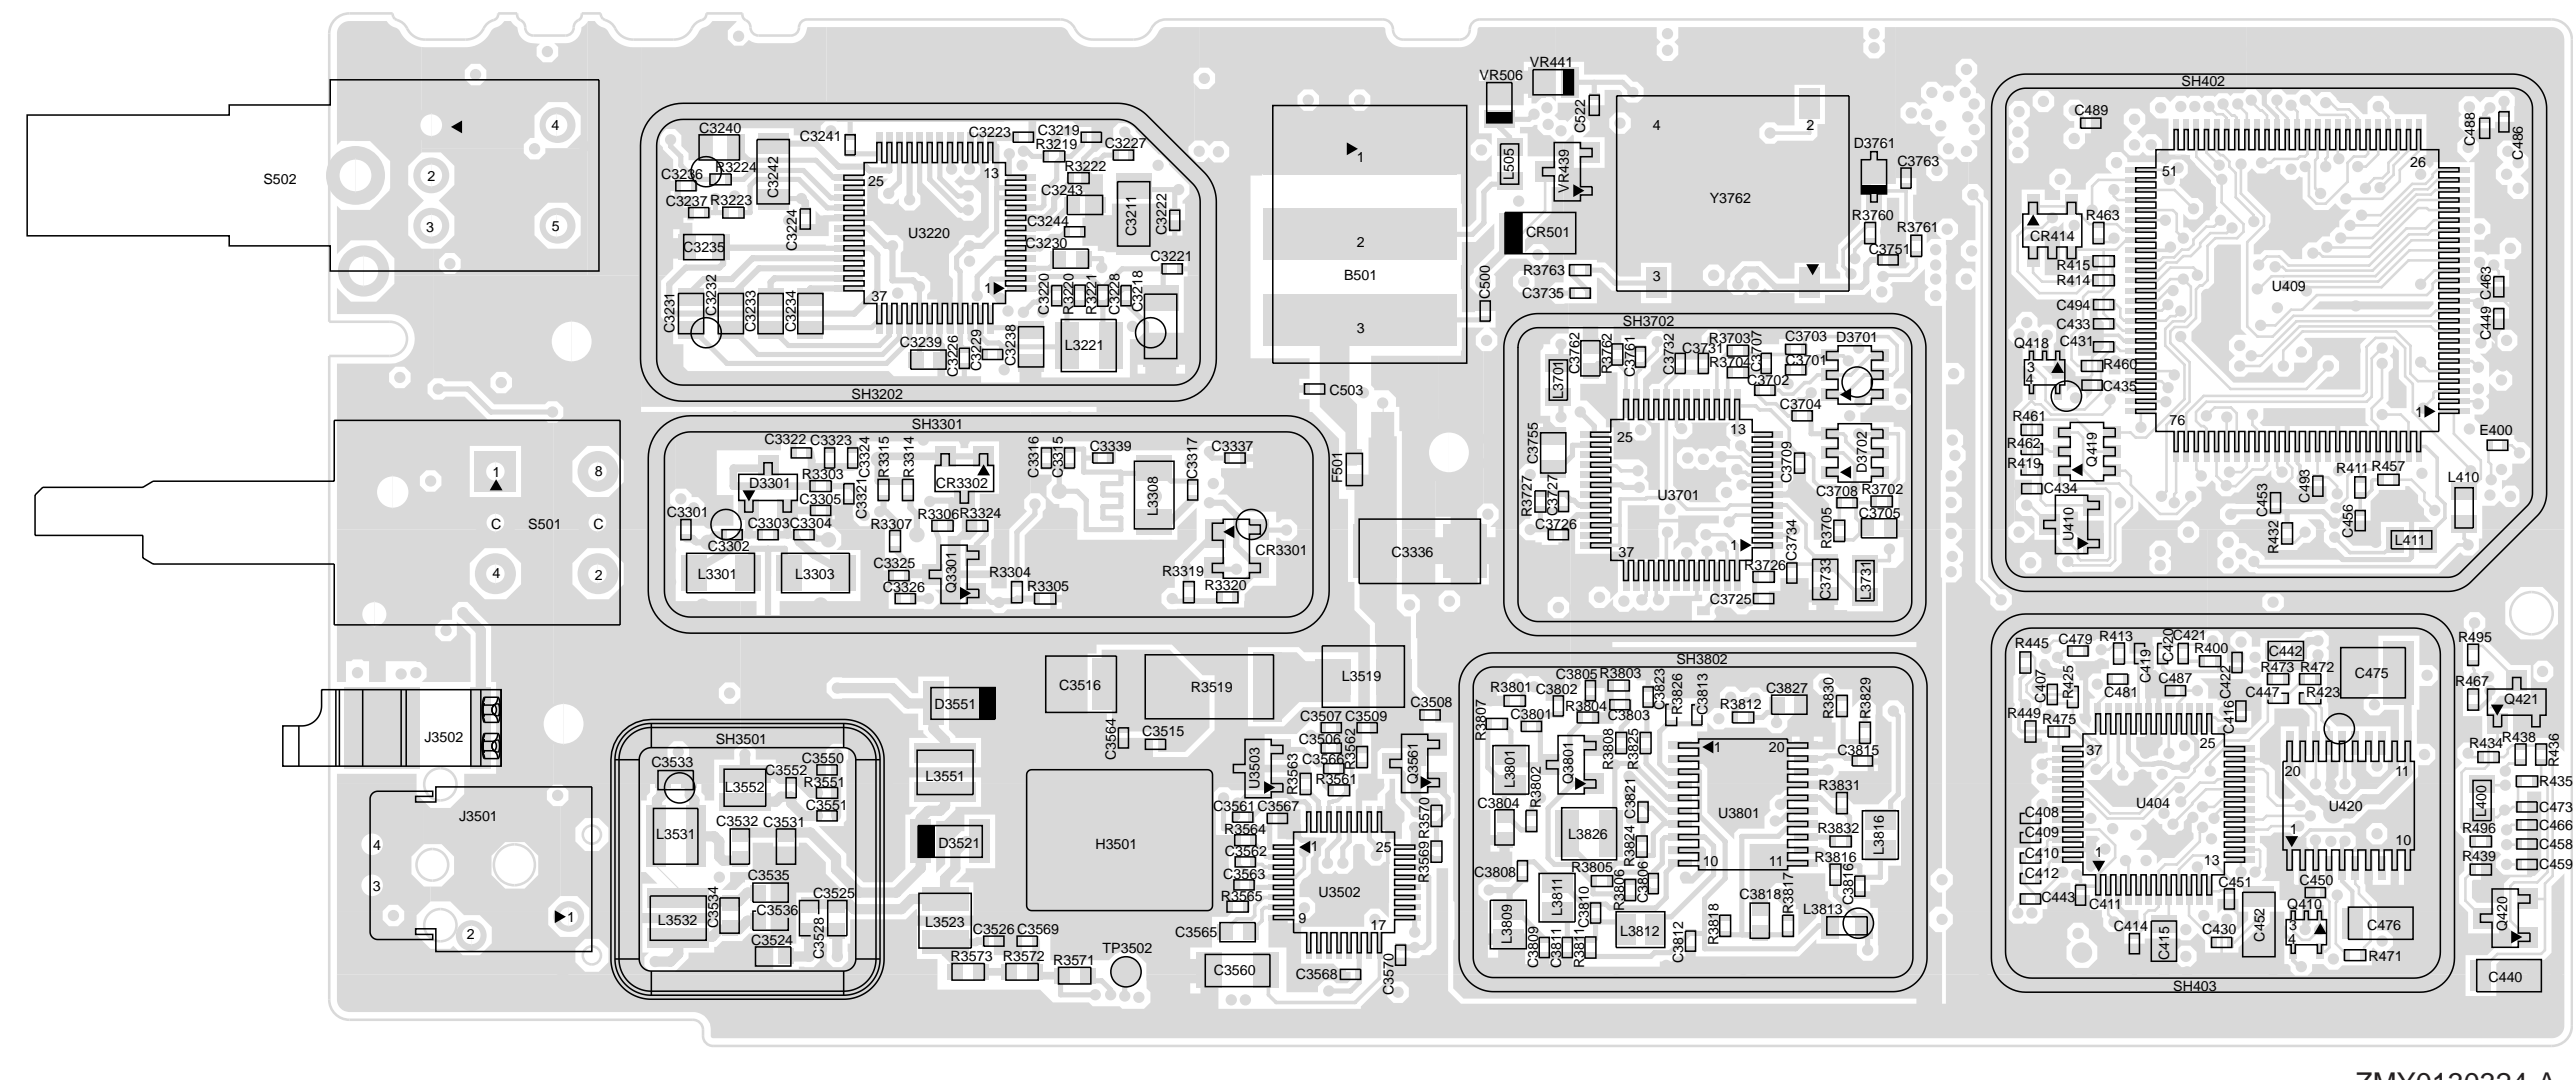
VHF (136-174MHz) Main Board Bottom Side PCB
